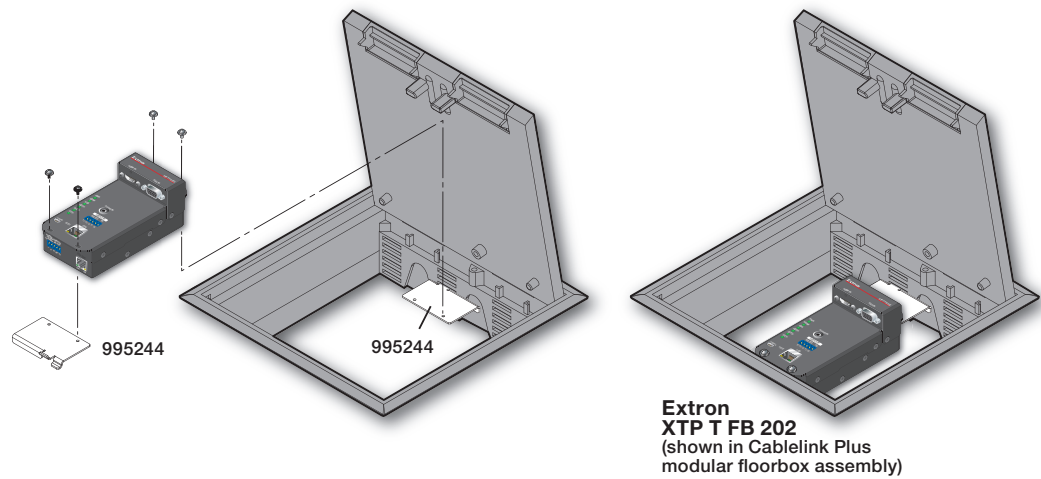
Mounting the XTP T FB 202 into an MK Electric CableLink Plus Modular Floor Box
